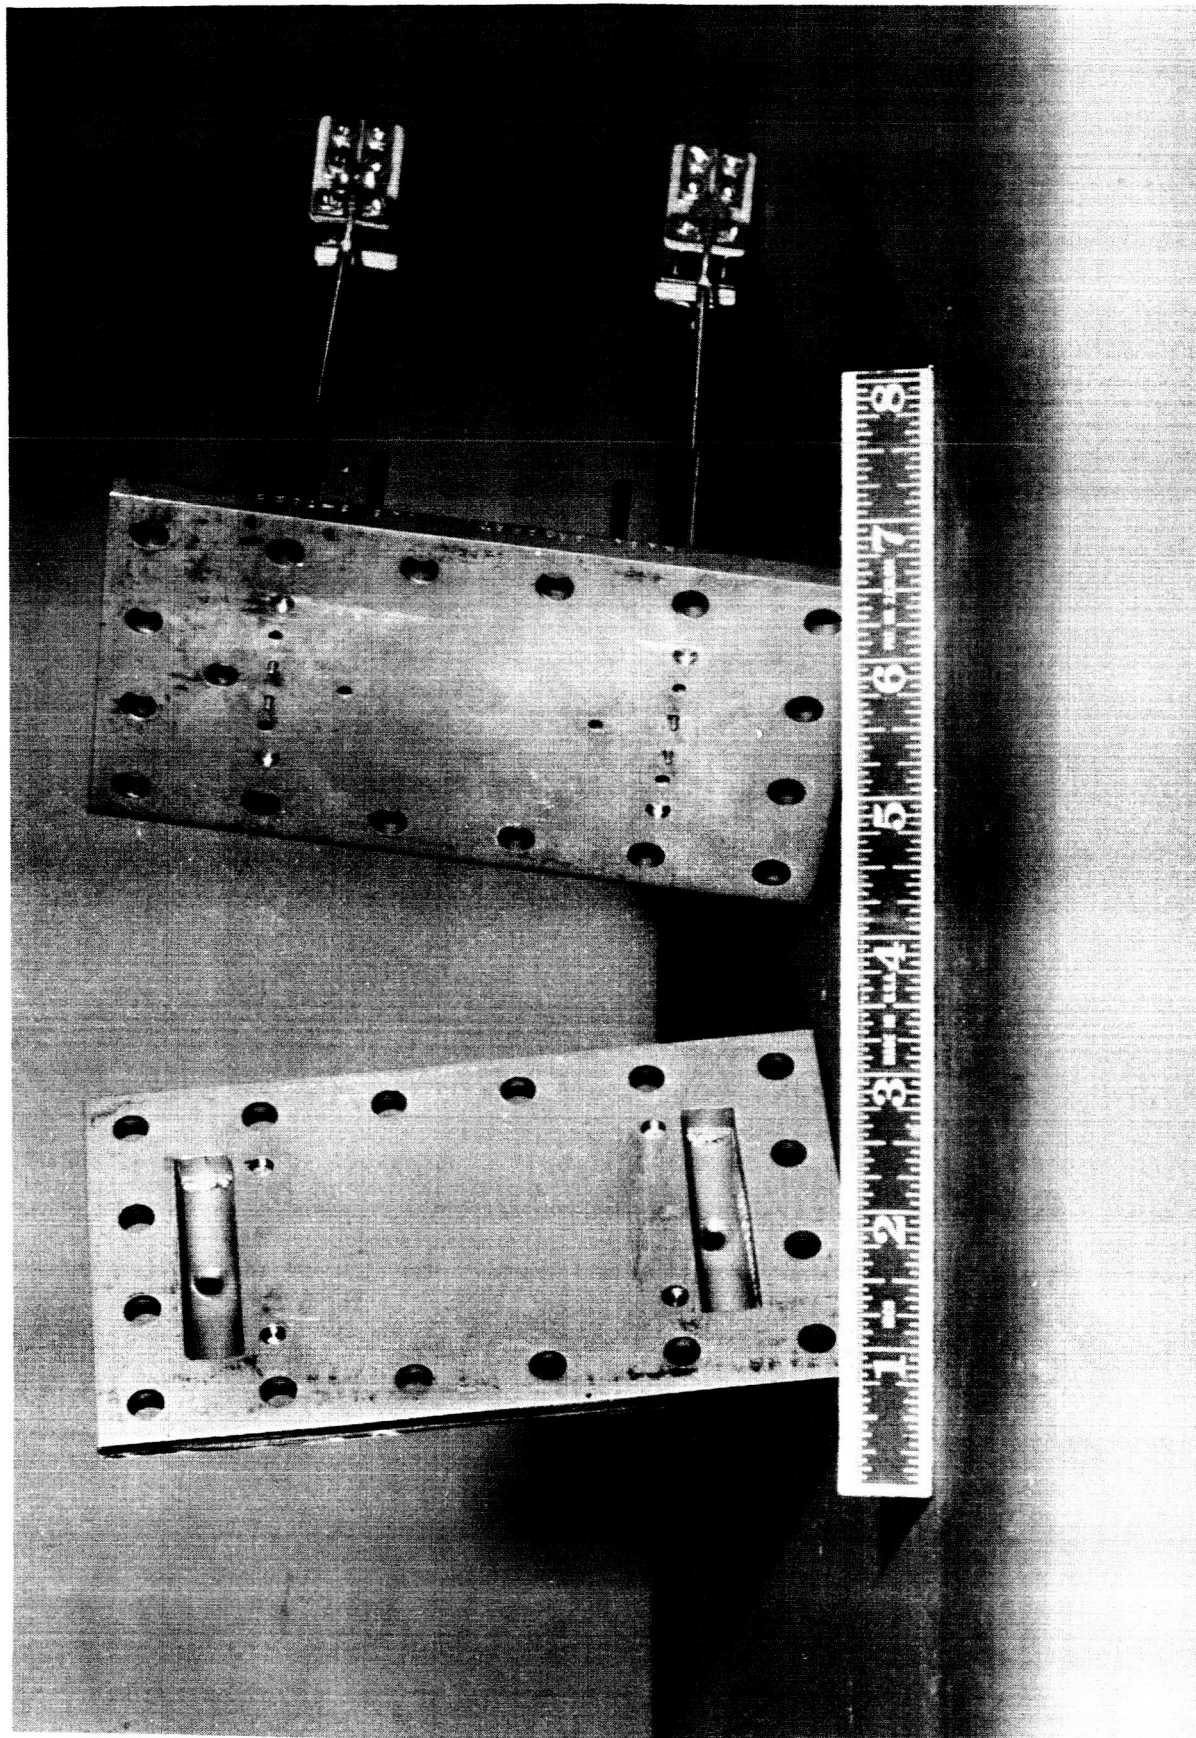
Inside View of Disassembled Wick Sample Holder, Showing Flow Inlet and Outlet Passages (Gaskets not Shown)
